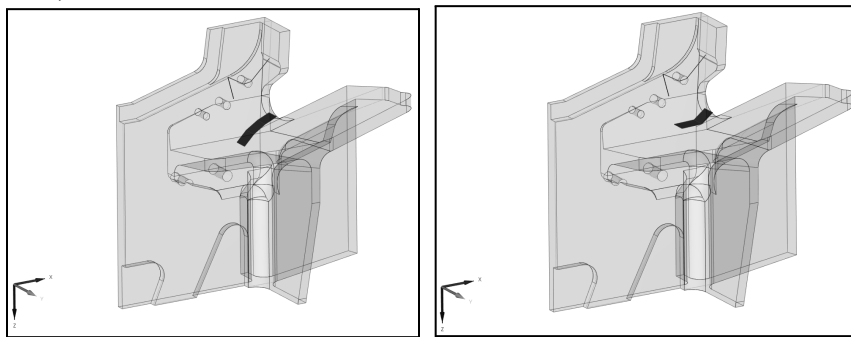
Example of CIVA 3D model for 2 types of crack started from the upper radius
